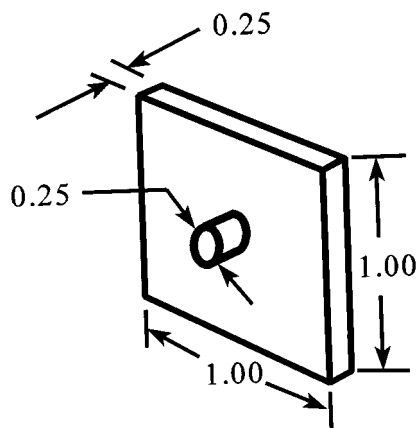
The aluminum mounting plate (three required) used to hold the diffraction gratings and tuning mirror to the adjustable optical mounts. The protruding pin inserts into the adjustable optical mount.
